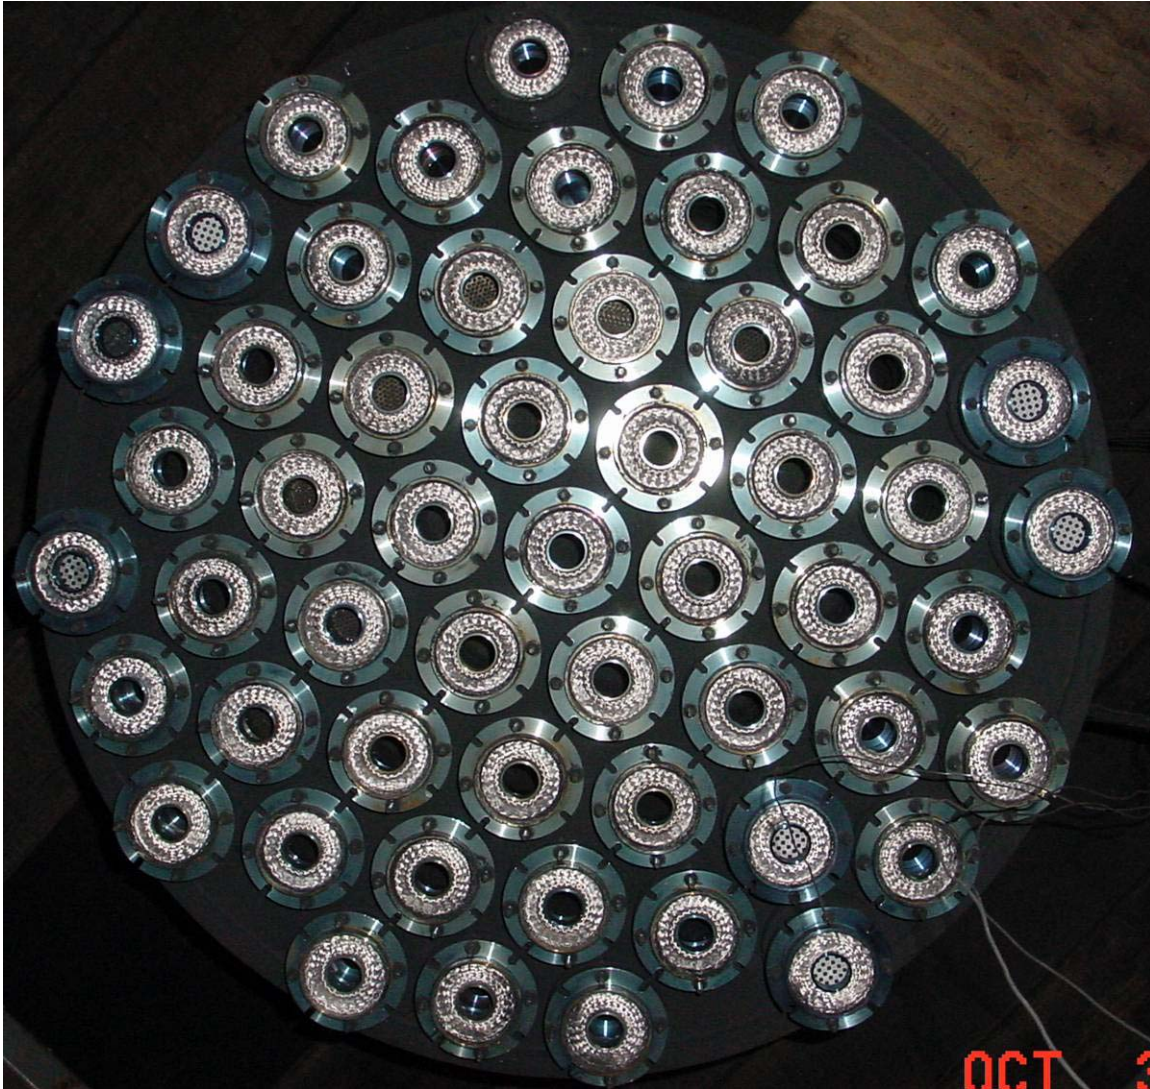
Primary Gaskets on Lower Plenum After TC09
